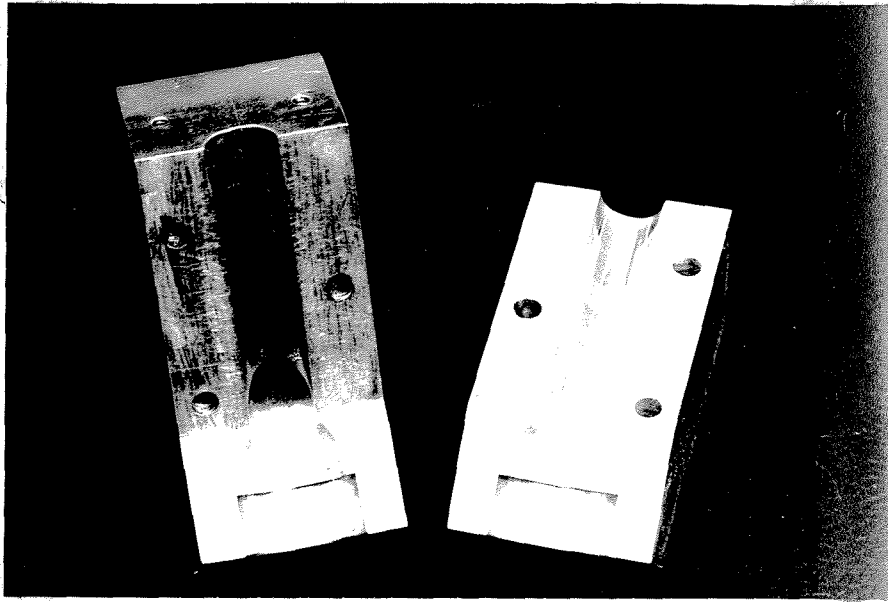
Two Aluminum Sections which Join to Form the Daughter Branch in which the Deposition was Measured. The Inside Wall of the Daughter Branch is Shown on the Left Section and the Outside Wall on the Right Section.
